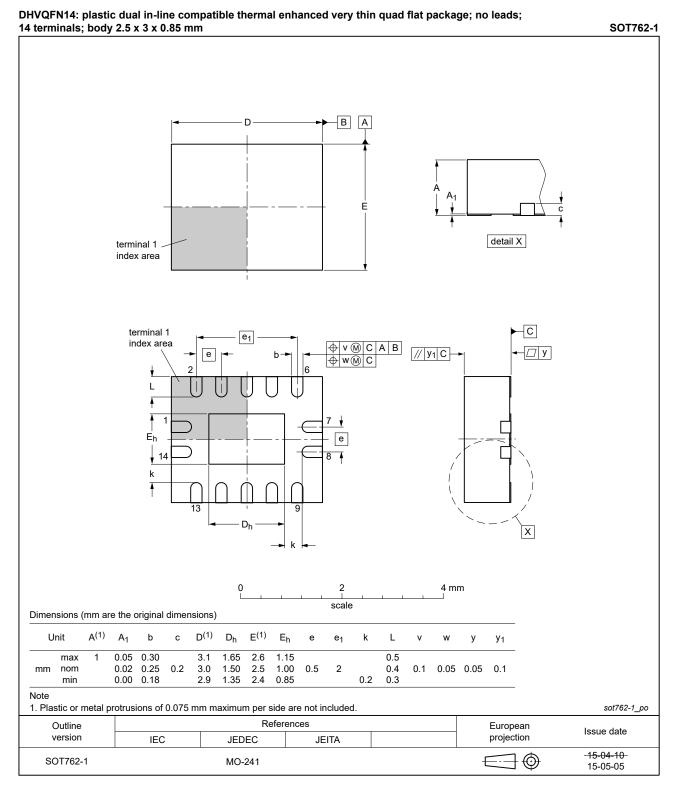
Package outline SOT762-1 (DHVQFN14)
